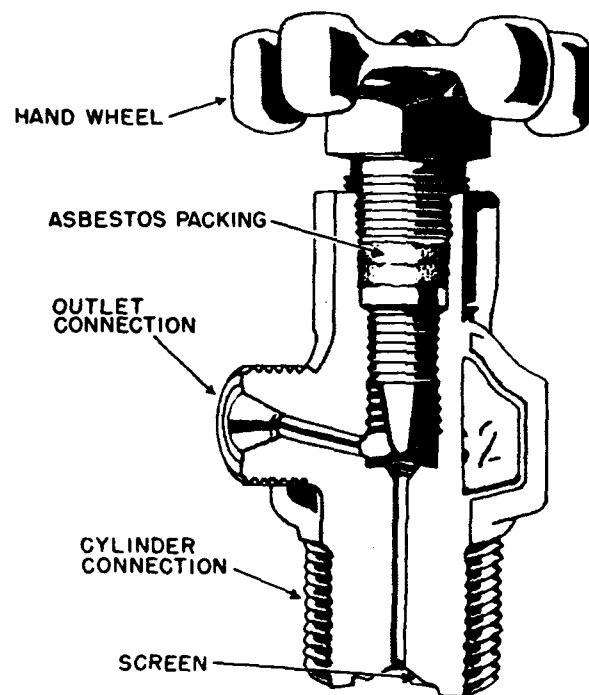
View 2. Cutaway view of acetylene cylinder valve.
